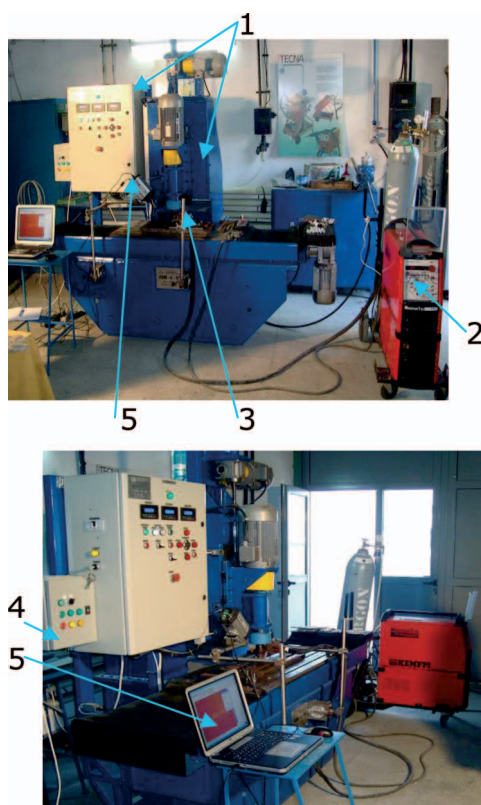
FSW-TIG Hybrid Welding System.
